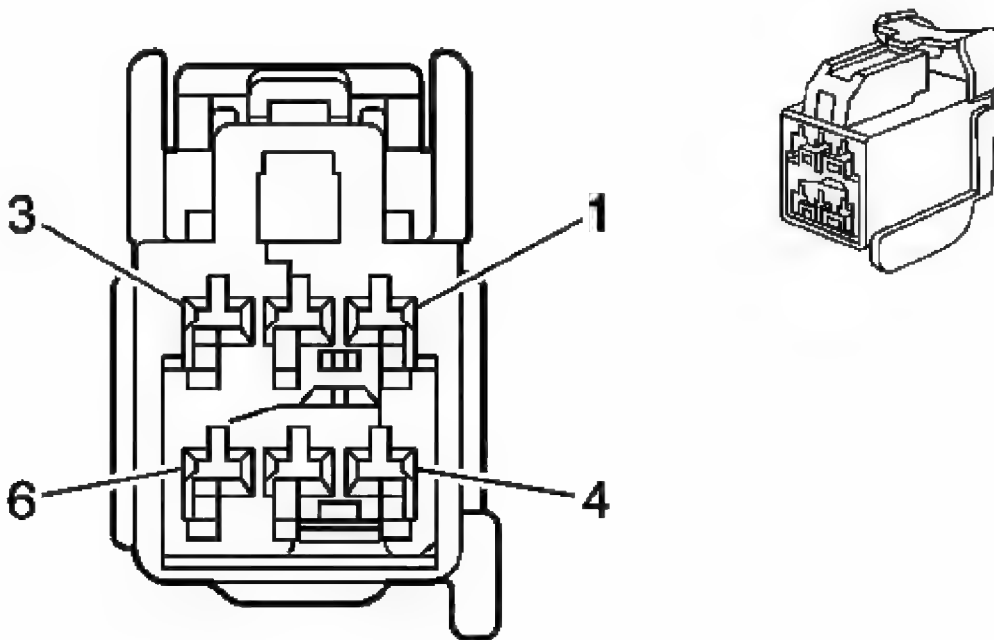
Driver Seat Adjuster Motor Assembly C2 (A45) Connector End View
